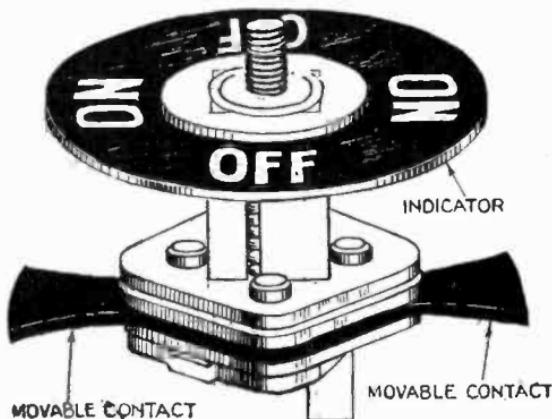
,056.—H & H snap switch movable contacts (blades) with indicator dial.
